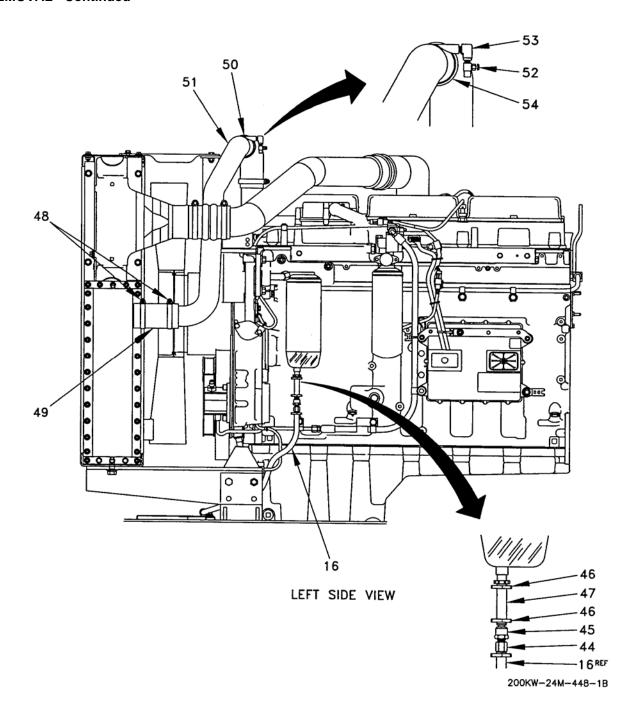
Coolant Hose Assemblies (Sheet 1 of 4).
